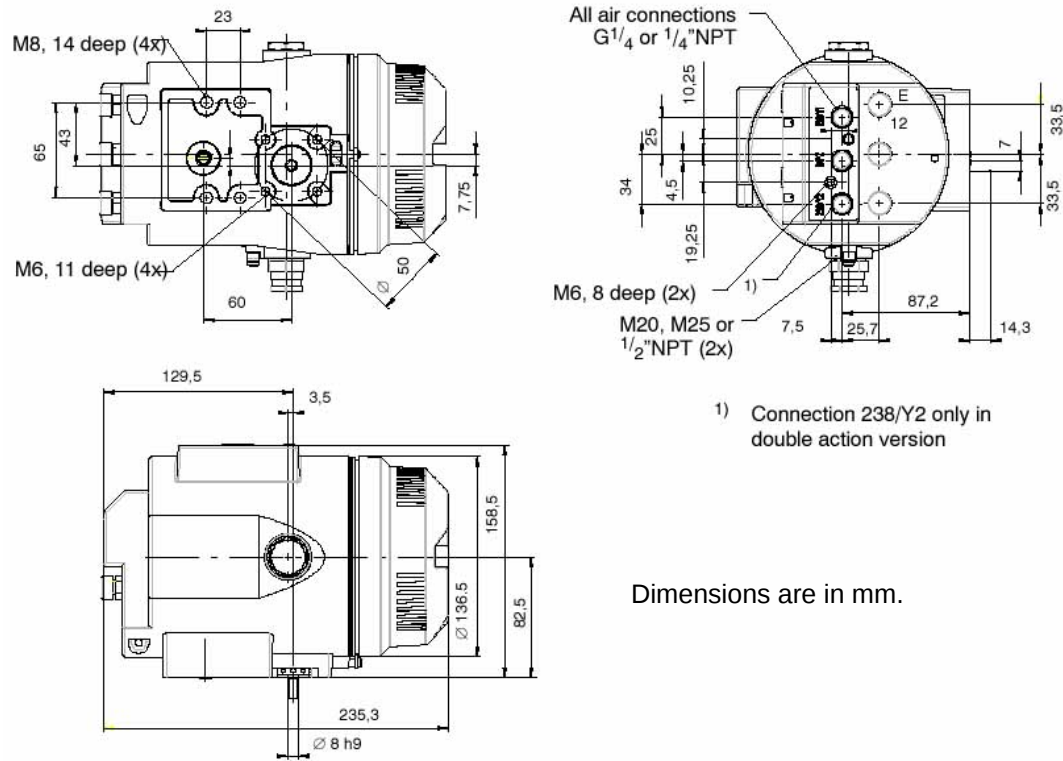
PS2 Dimensions, Explosion/Flame-Proof Enclosure
